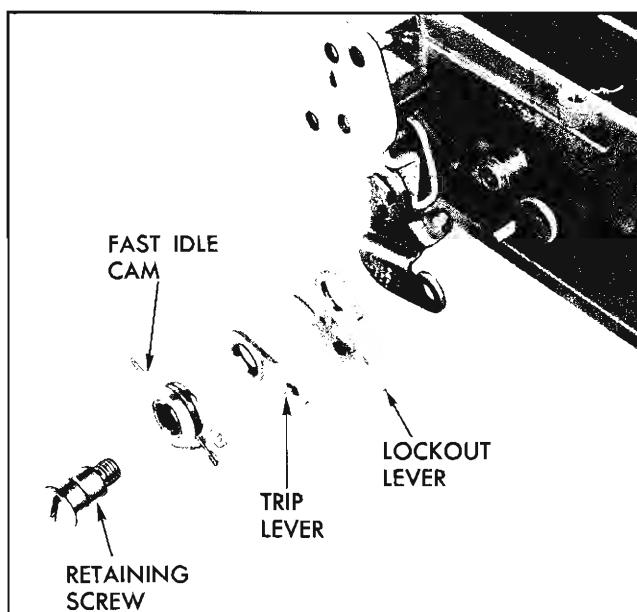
B-117 Lockout Lever and Fast Idle Cam
